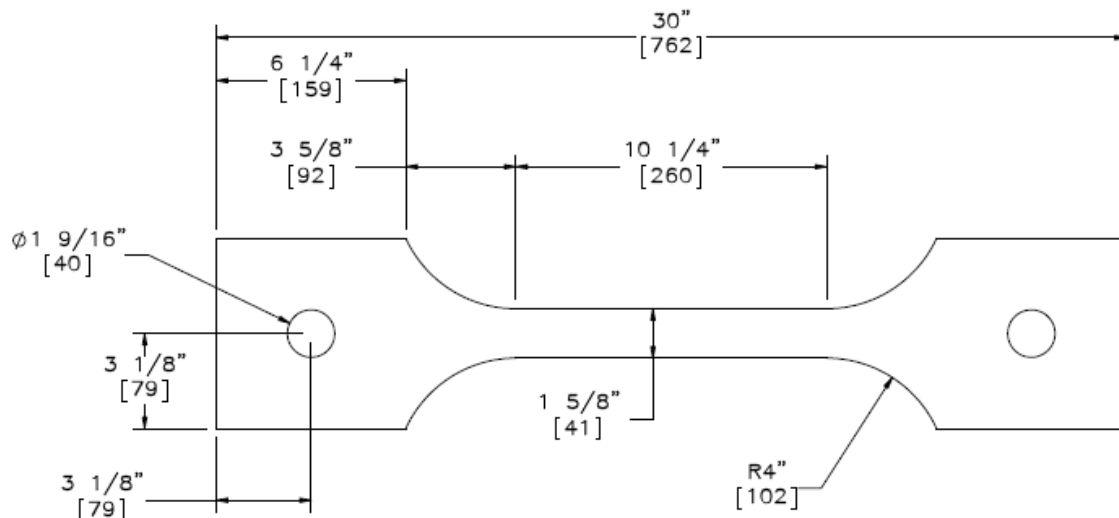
Dimensions of Enlarged Steel Tensile Coupons
